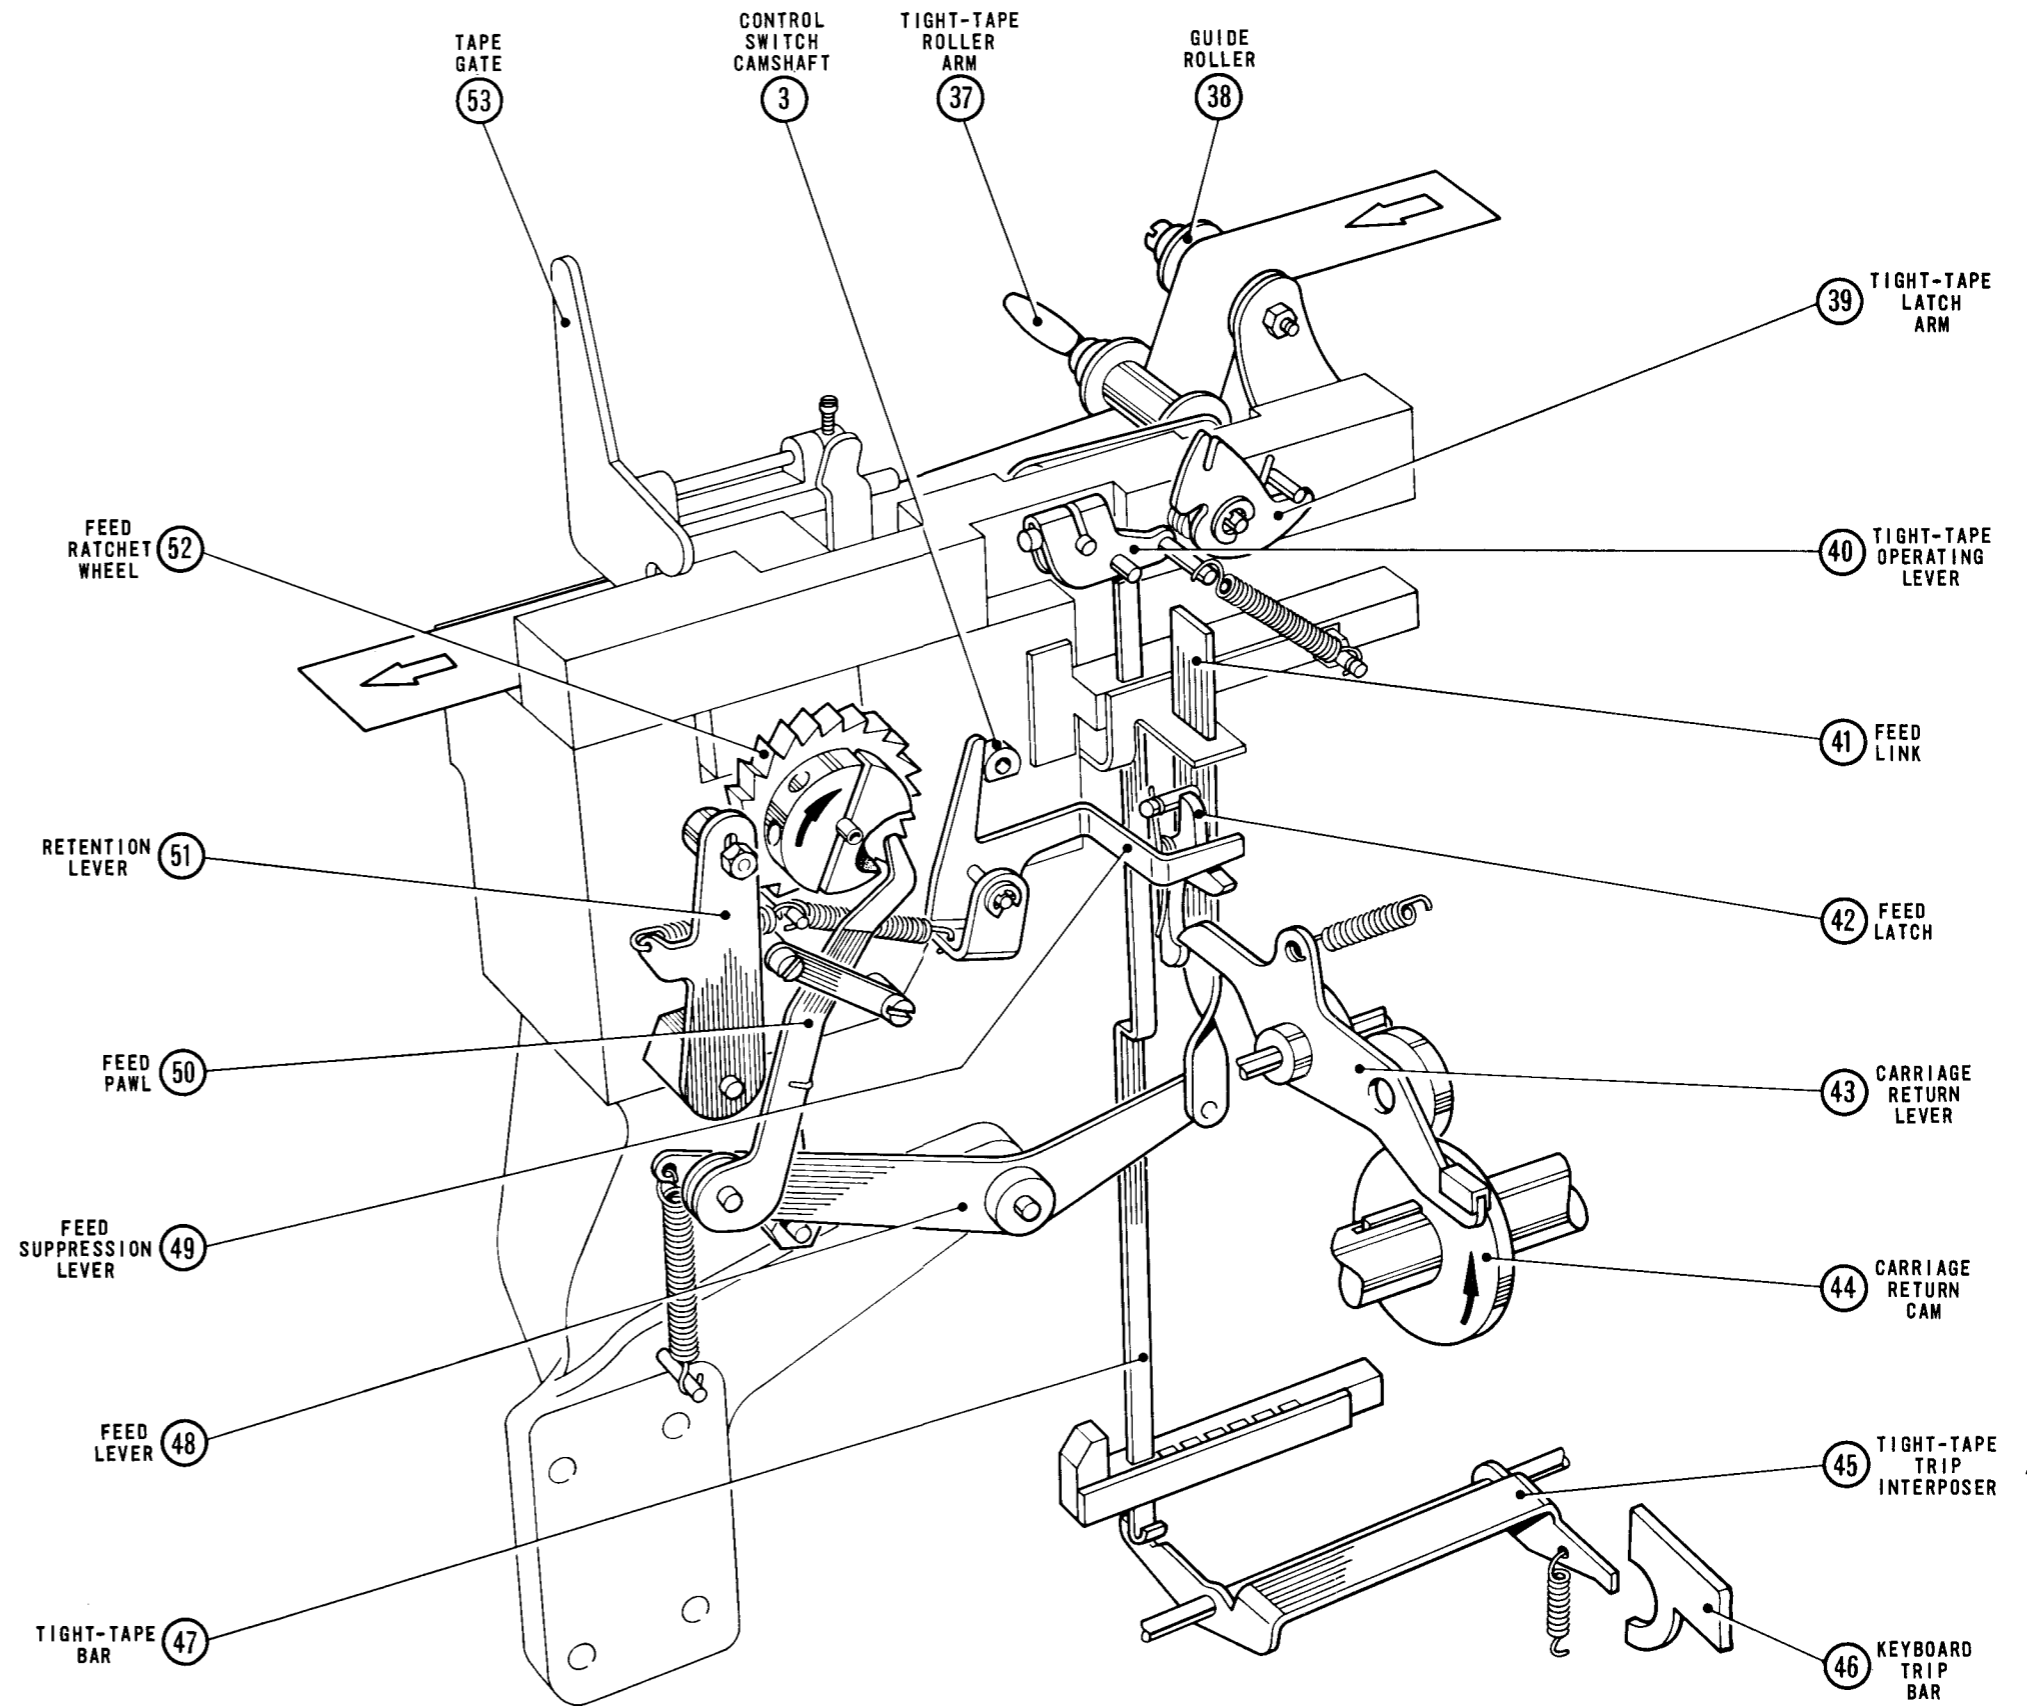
FEED AND TIGHT-TAPE MECHANISMS
